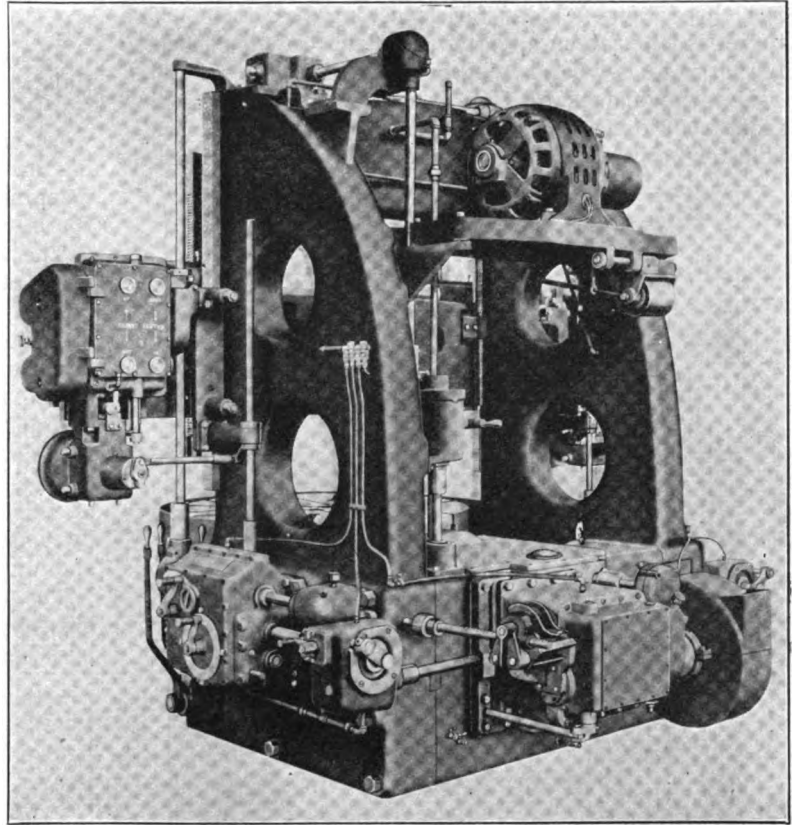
REAR VIEW OF 42-IN. MACHINE
